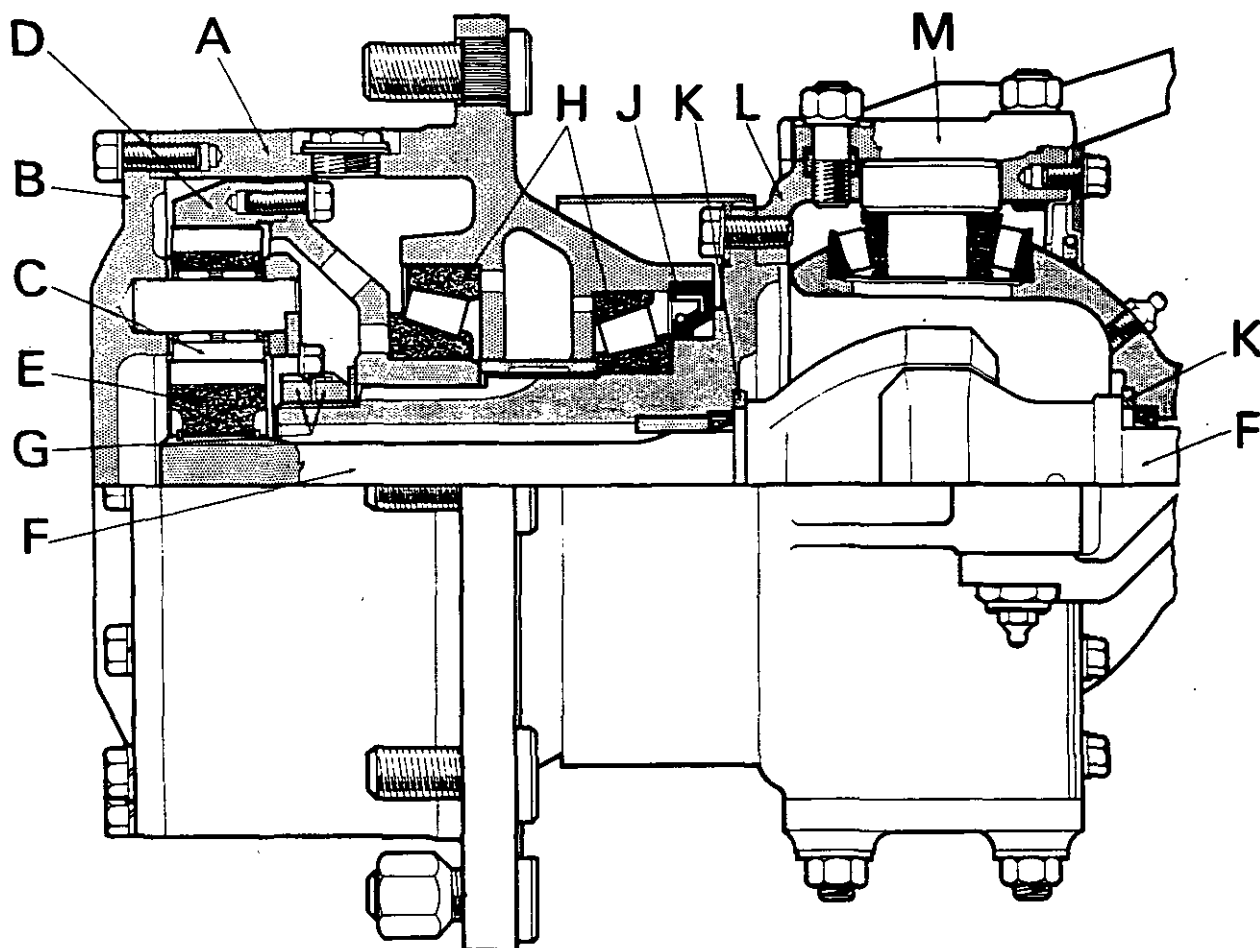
FRONT HUB AND SWIVEL HOUSING
